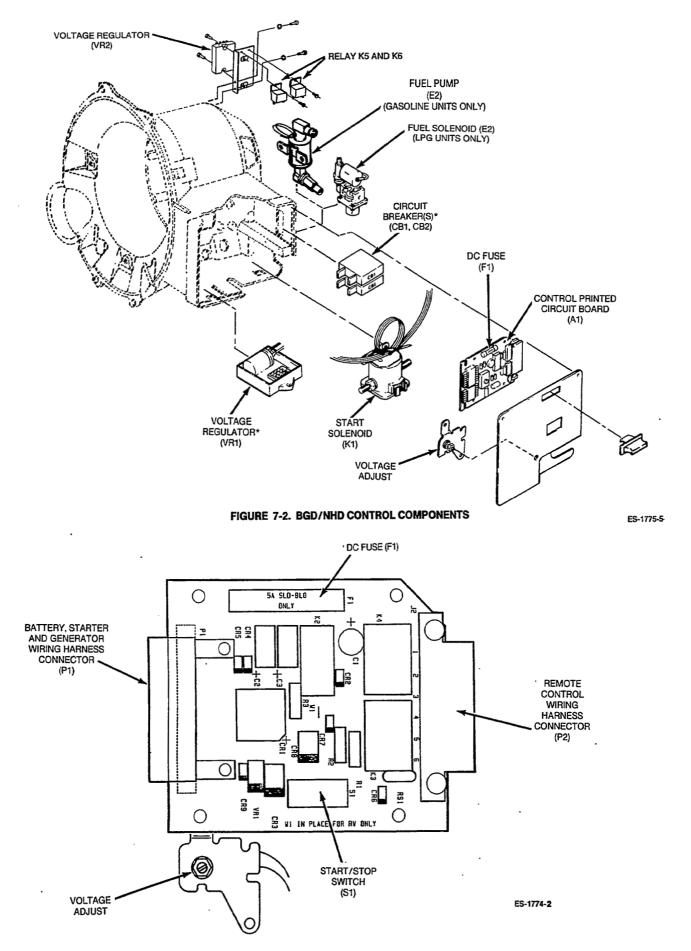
BGD, NHD CONTROL P.C.B. ASSEMBLY (A1)
